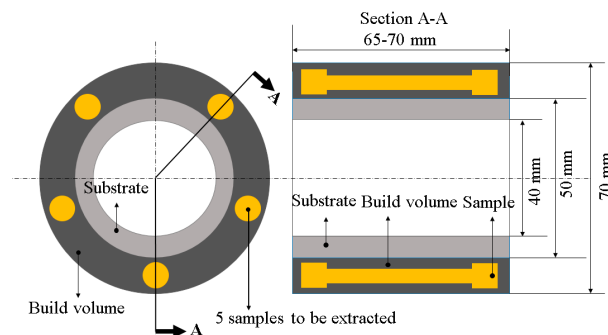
Tensile sample manufacturing scheme and geometry of the volume built up.
